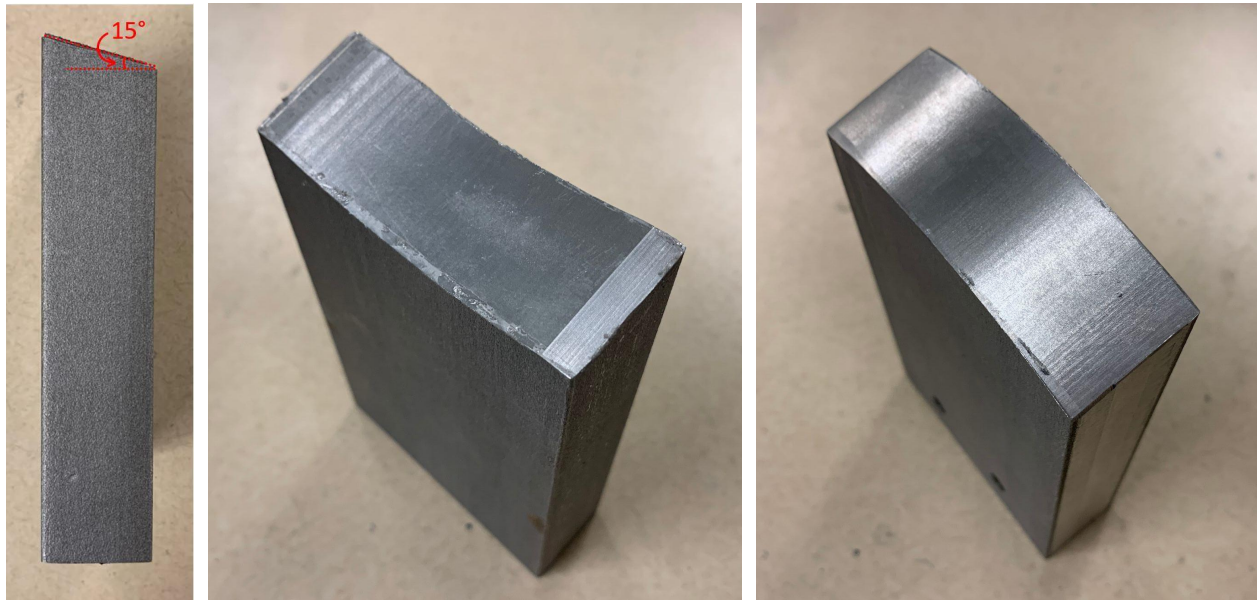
Side view of lower female shear die with angle of die labeled (left), isometric view of lower female shear die (middle), and isometric view of upper male shear die (right).
